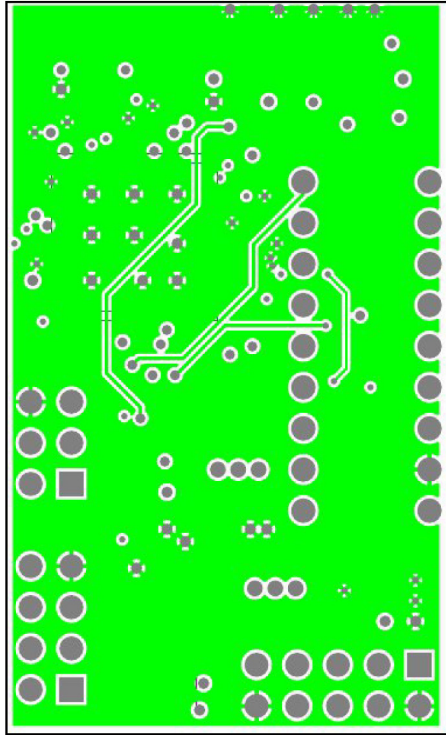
PC Interface Board; Bottom Side, Top View (as if PCB was Transparent)
